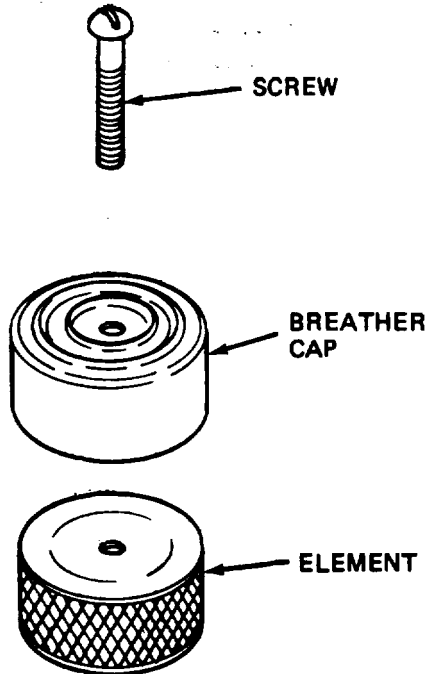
30. Hydraulic reservoir breather. exploded view.
